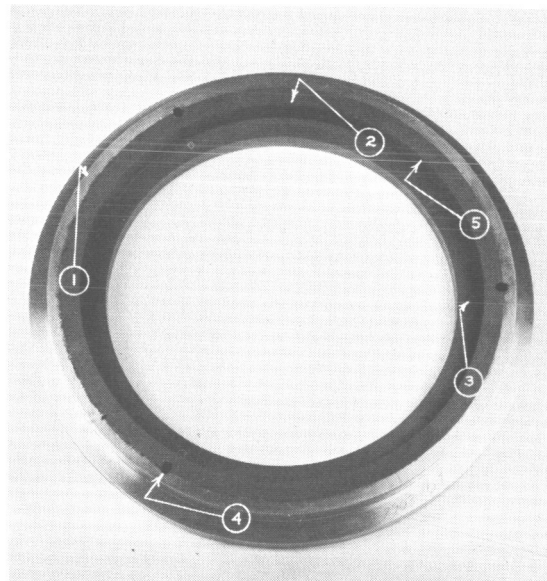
Mainshaft Seal Rig 29360 B - Build 1. Rear Side of Stein Seal Company Orifice Compensating Hydrostatic Carbon Seal Ring Assembly. Note: 1. Carbon Carrier Band. 2. Carbon Seal Ring. 3. Orifice. 4. Hole for Lock Pin. 5. Piston Ring Bore XP-66916
